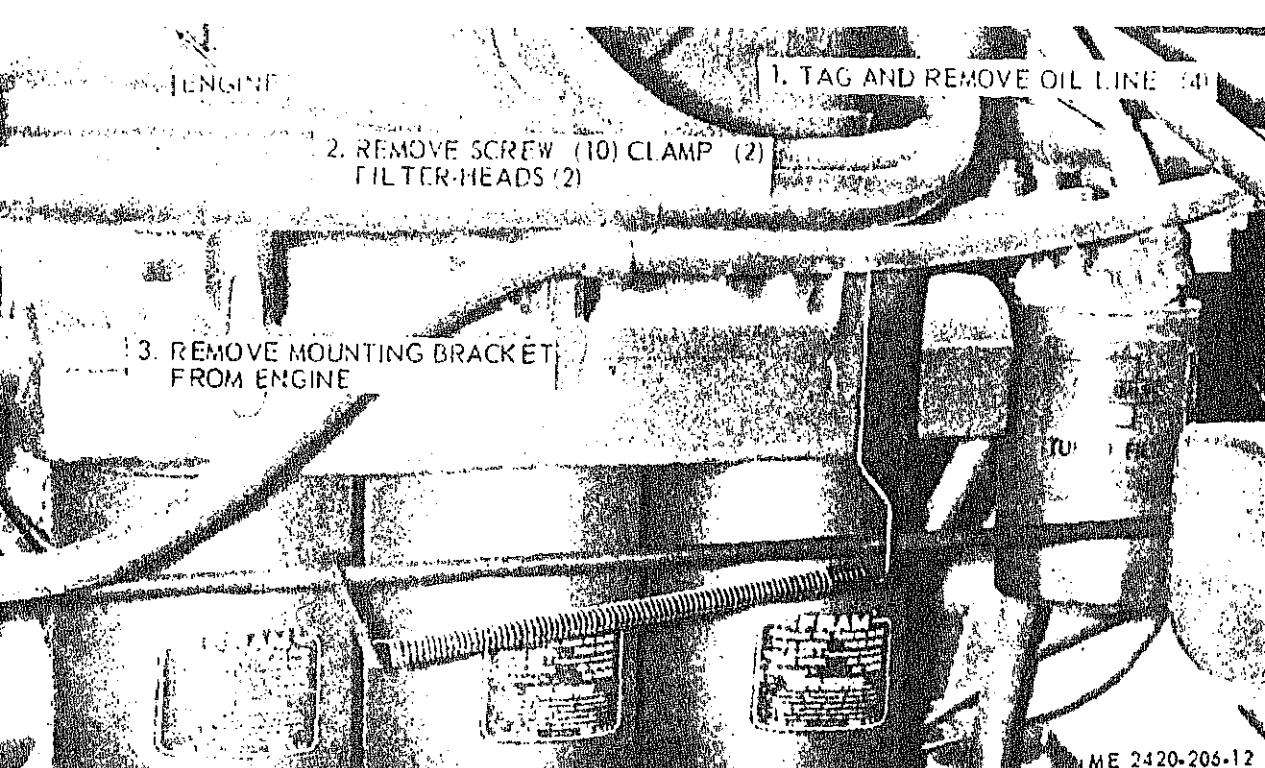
Engine and turbocharger filter head, removal and installation.
